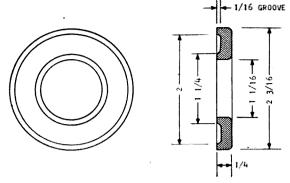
Drawing showing dimensions of end-spacers used on both the medium and high power toroidal tank coils. Polystyrene, 1/4 inch thick is used to make the end-spacers by means of a chassis fly-cutter mounted in a drill press. Wire tension and friction hold the end-spacers in place.
